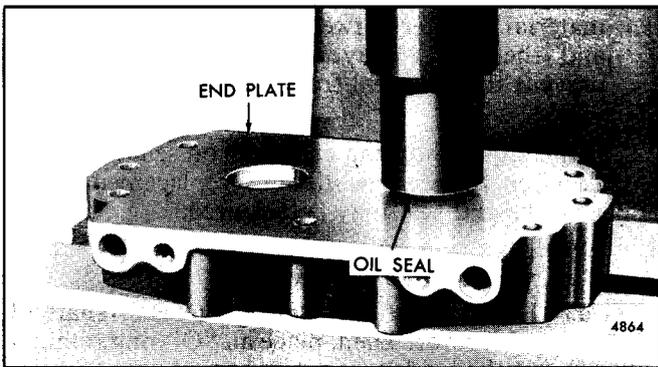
Installing Lip Type Oil Seal in End Plate with Tool J 22576
